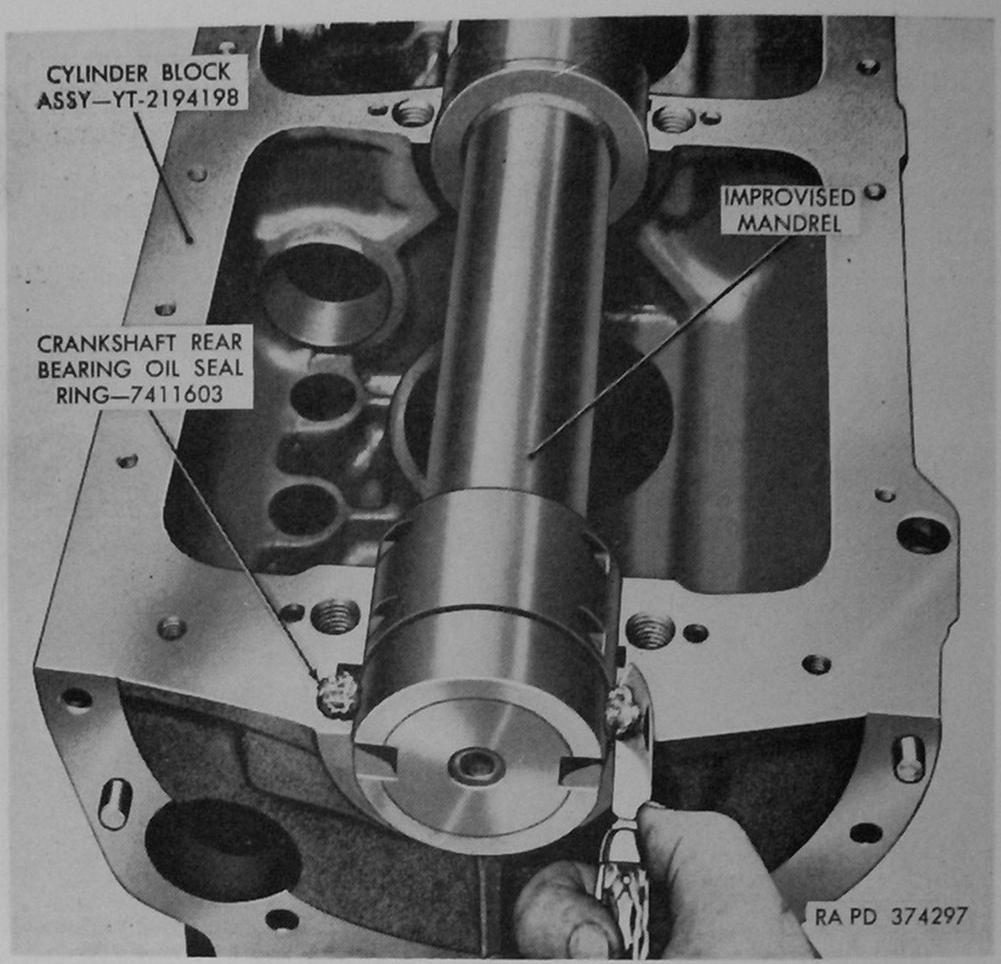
Installing crankshaft rear bearing oil seal ring using improvised mandrel.
